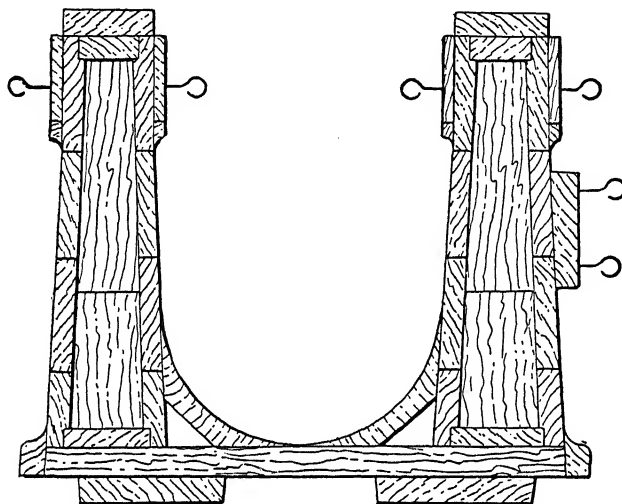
Section through Crank-shaft Bearings of Engine Bed. Pattern shows boxing-up, prints for cores, and loose pieces
